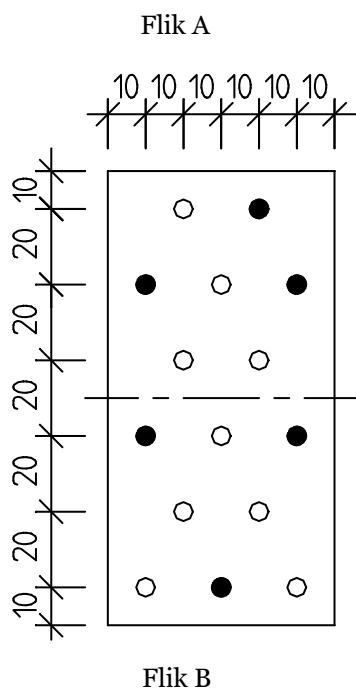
Dimensions of Angle Bracket type 1/60x60x2,0/2,5x60
